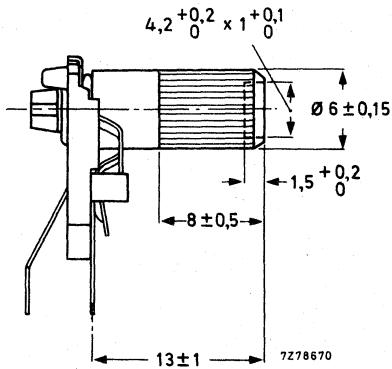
Test switch for vertical mounting with adjustment knob at the side of the selector contact.
